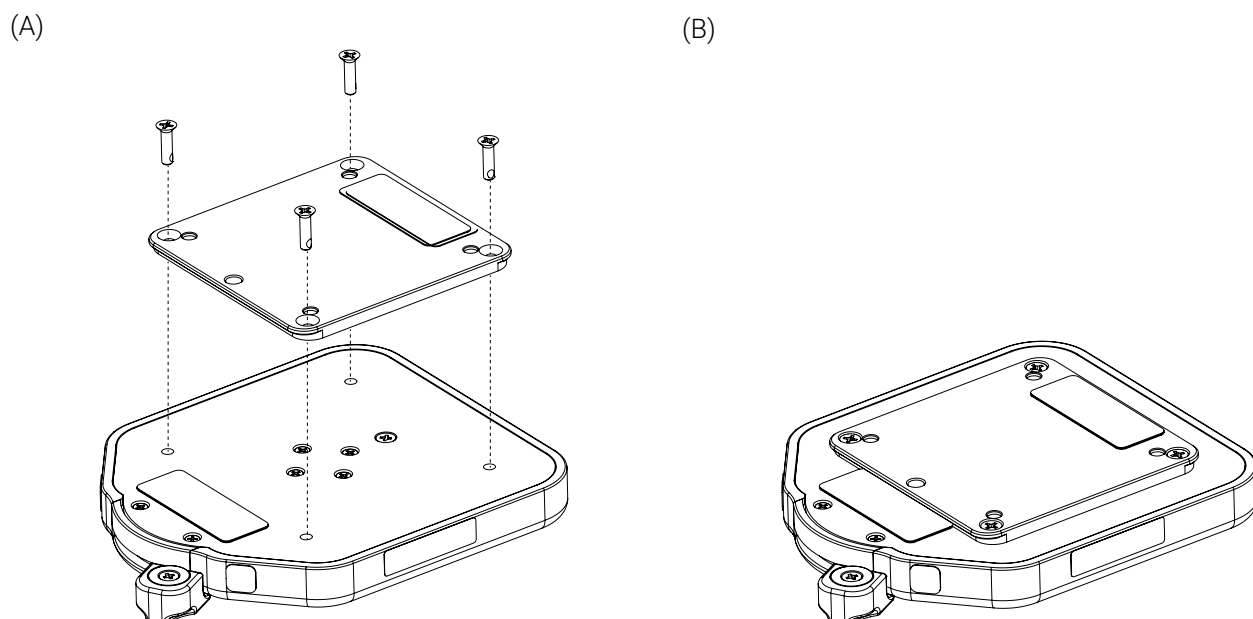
Installing the Flex Adapter on the Universal Mounting Base
